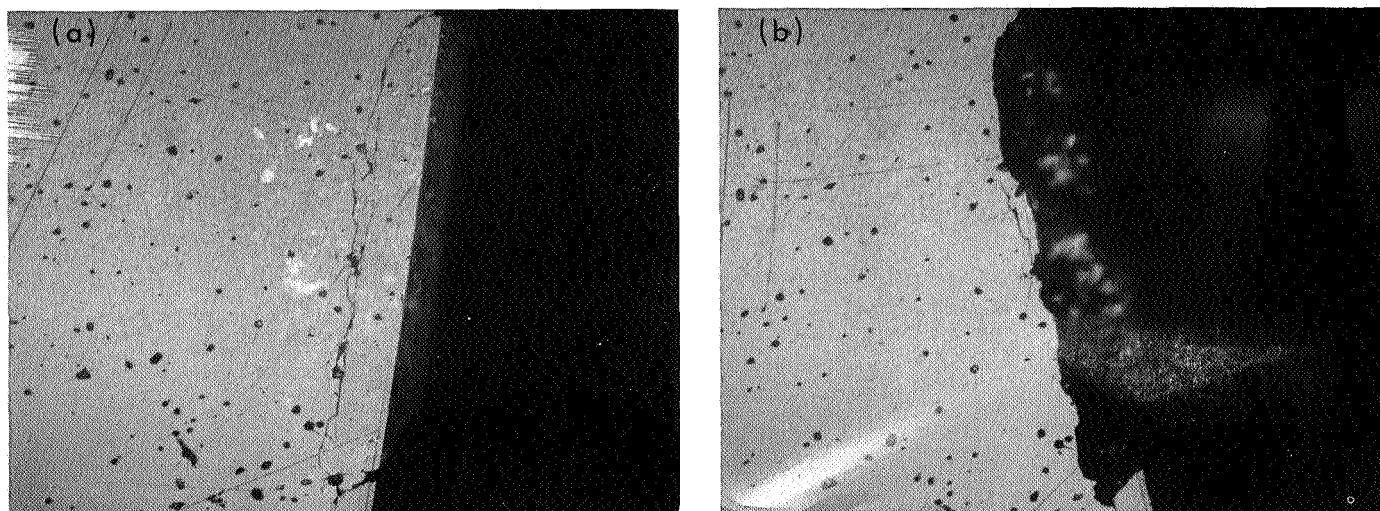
Rotor chip (80x); (a) as disassembled, (b) after gaging
